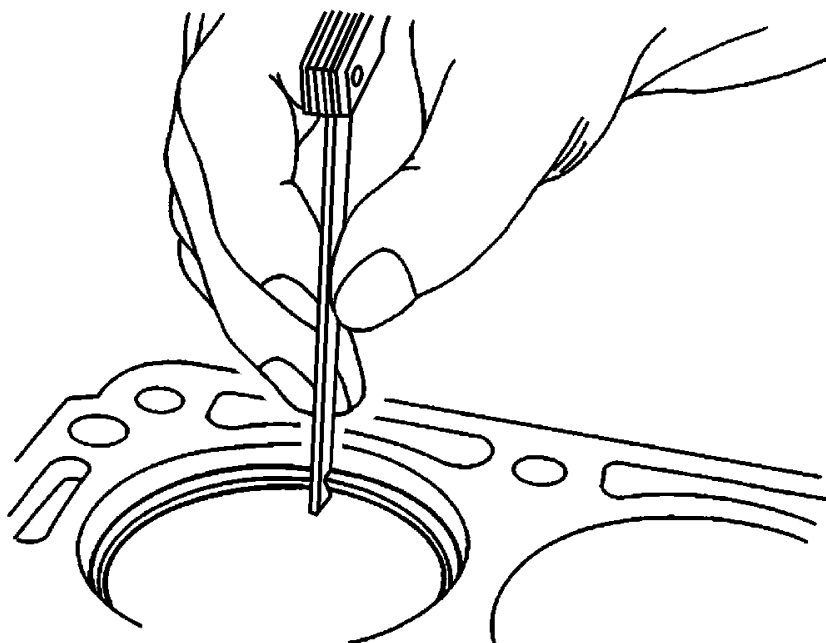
Measuring Piston Ring Gap Using Feeler Gage
